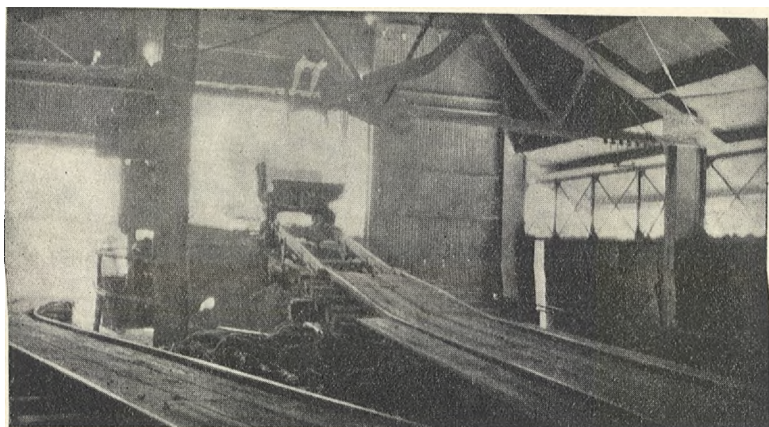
CARS ENTERING CLAY STORAGE SHED AT BRICK PLANT AT FERRIS, TEXAS
